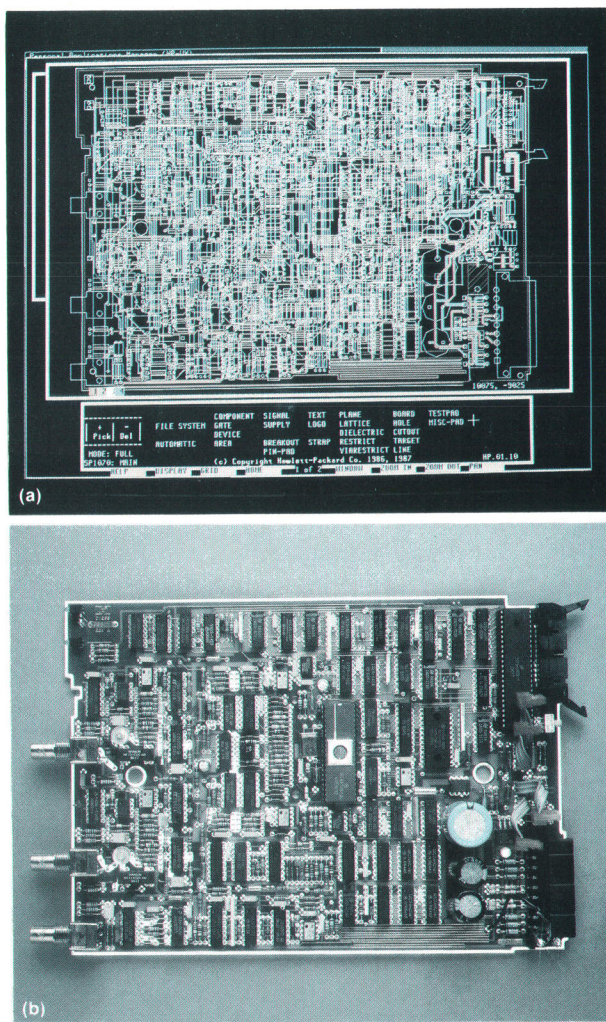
(a) Layout of board using HP PCDS. (b) Actual board for (a).
